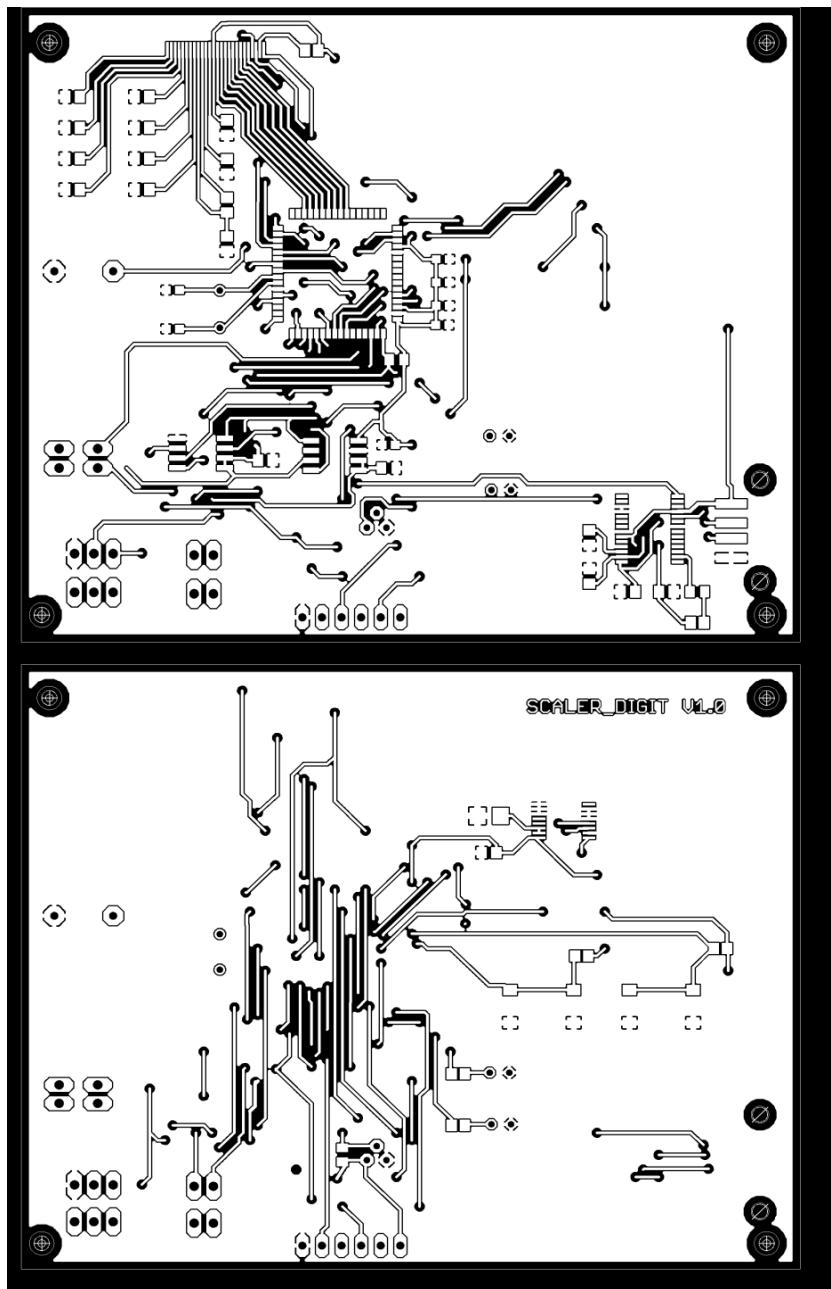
Control circuits printed circuit board a) bottom side b) top side
